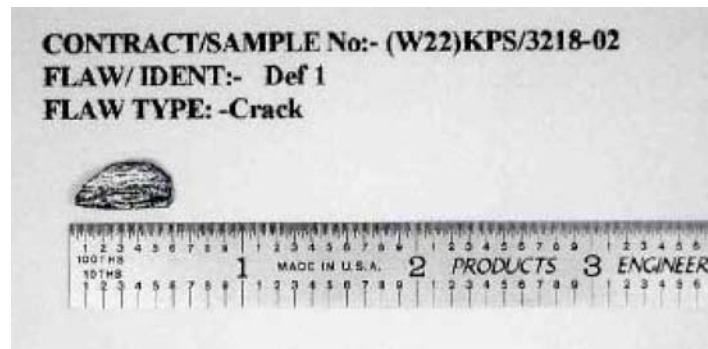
Example Flaw Coupon as Used for Test Blocks 5.1–5.3
